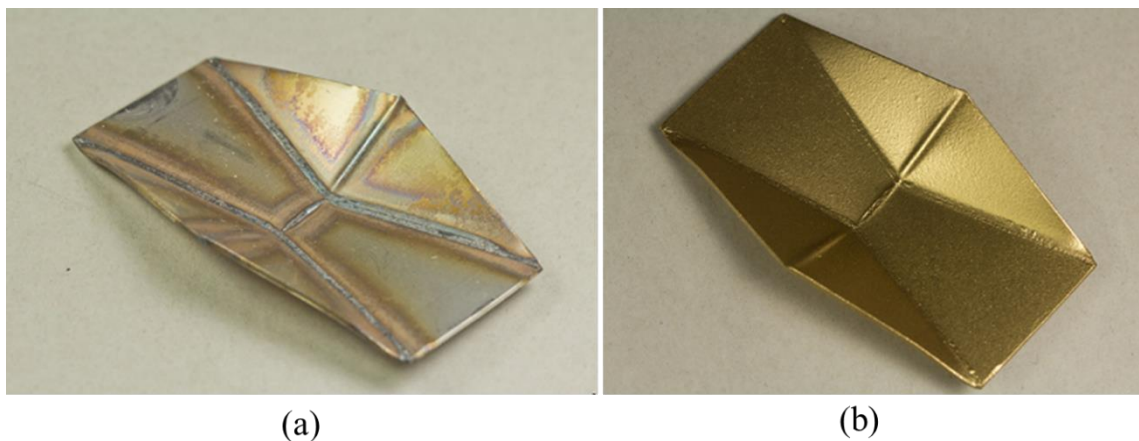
(a) 3D spoon geometry formed with laser bending (b) spoon after improved surface quality by sandblasting and spray coating
